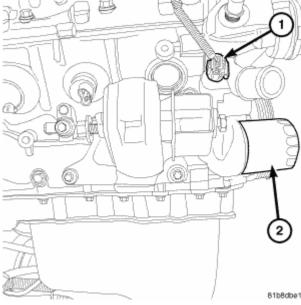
3.8L Oil Pressure Switch Courtesy of CHRYSLER LLC
